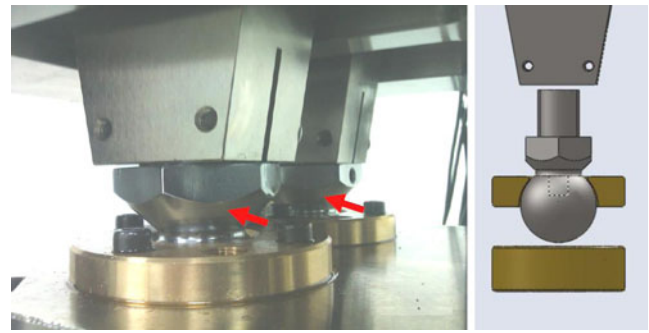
Ball joints with screw to adjust the parallelism of slide
